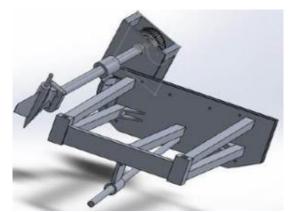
Solid Works Model of Surface Drive w/ Endurance Motor
